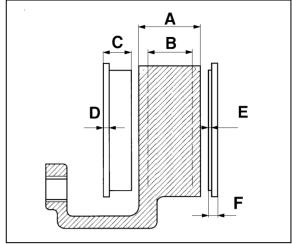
ROTOR AND PAD WEAR LIMITS
